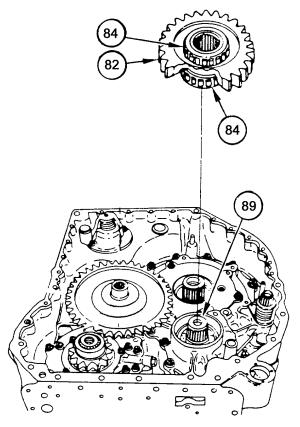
Steer Shaft Drive and Range Output Drive Gears.
